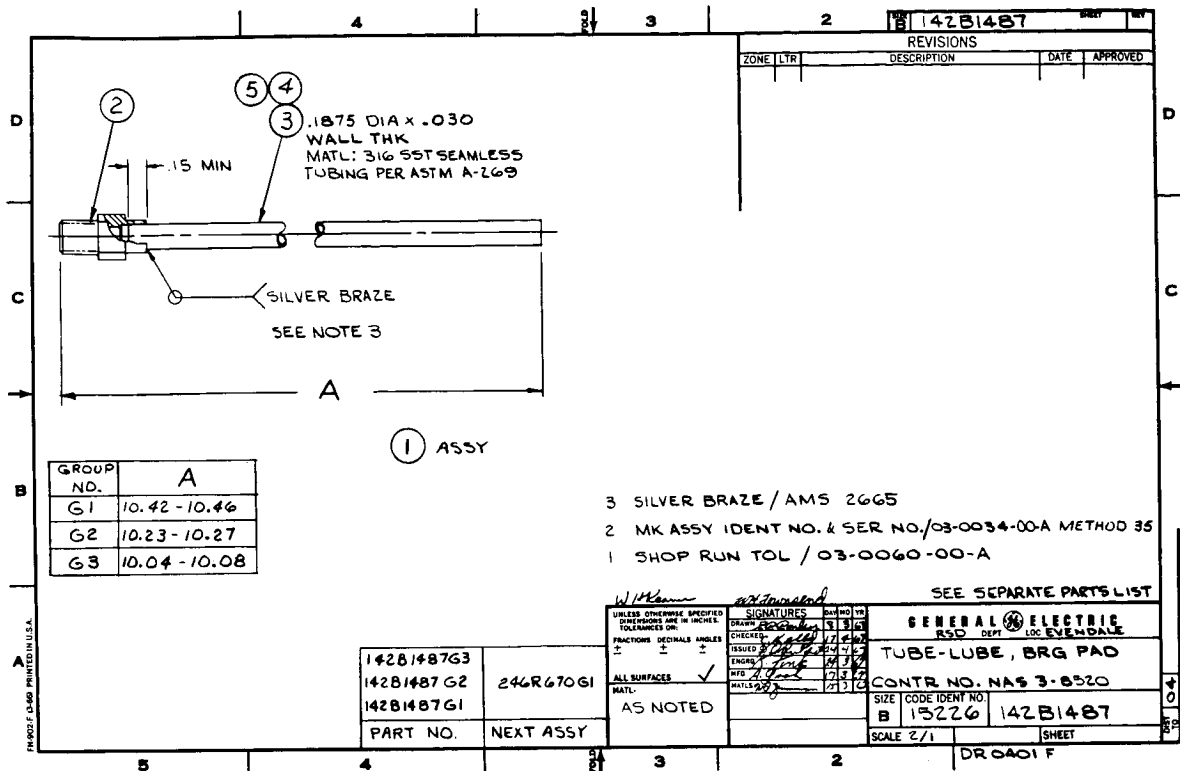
Lubrication Feed Tube for Pivoted Pad Bearing.
